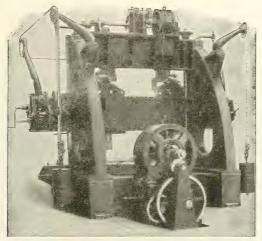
BORING MILL WITH MOTOR DRIVE, 4 TO I SPEED RANGE.
